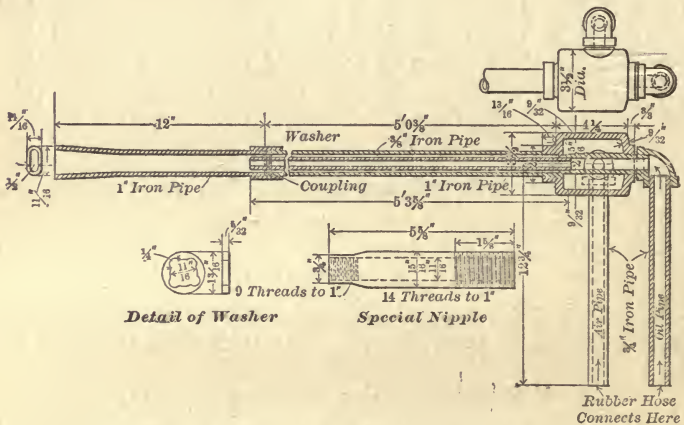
OIL BURNER FOR OPEN-HEARTH FURNACE
